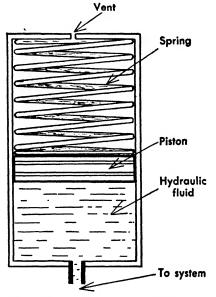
A schematic drawing of a spring-loaded accumulator.
